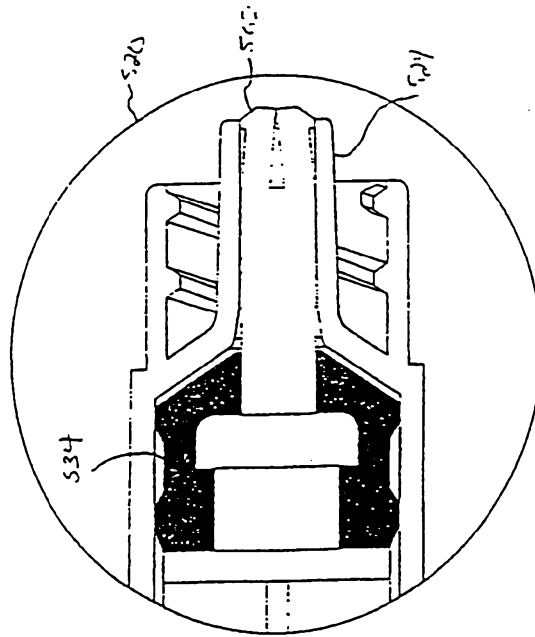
A SIDE VIEW - ONE-HALF ENGAGEMENT POSITION
